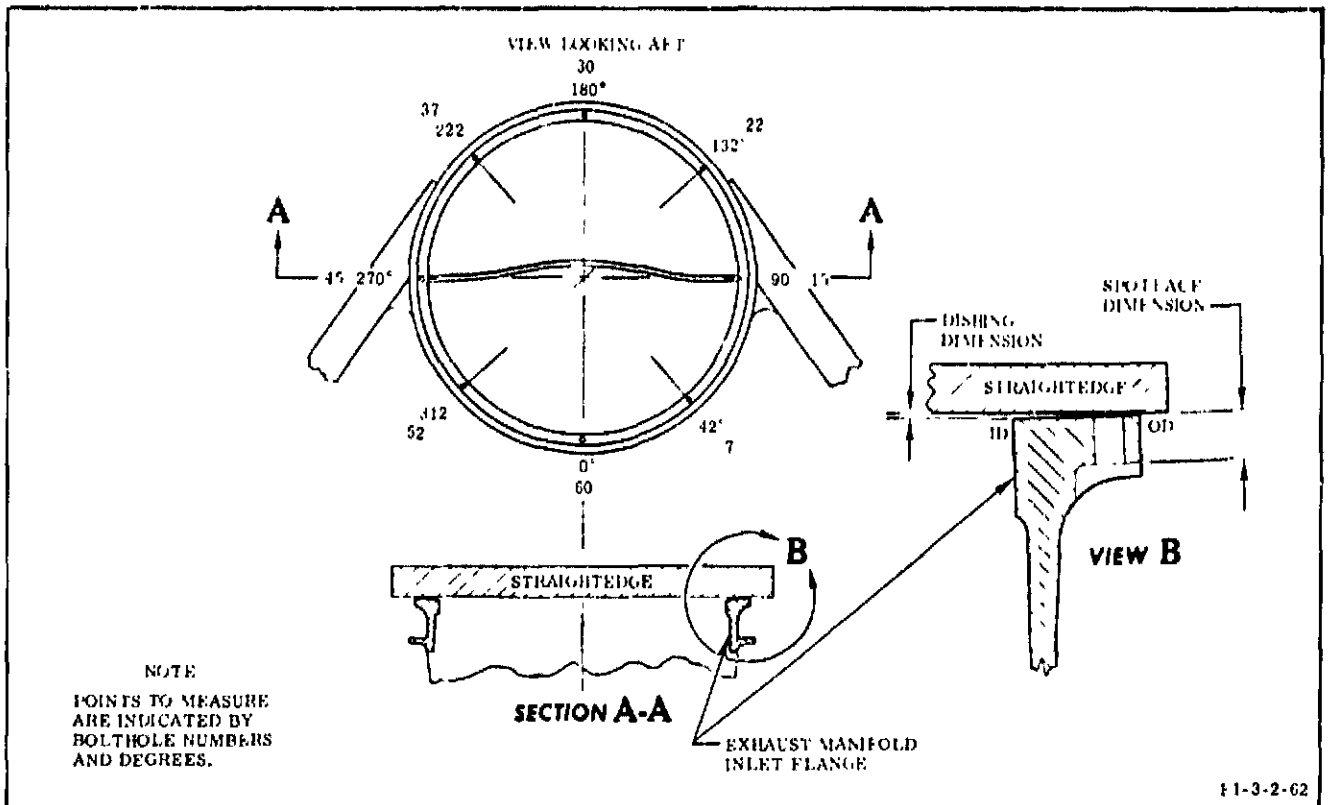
Thrust Chamber Exhaust Manifold Inlet Flange Dimension Locator
